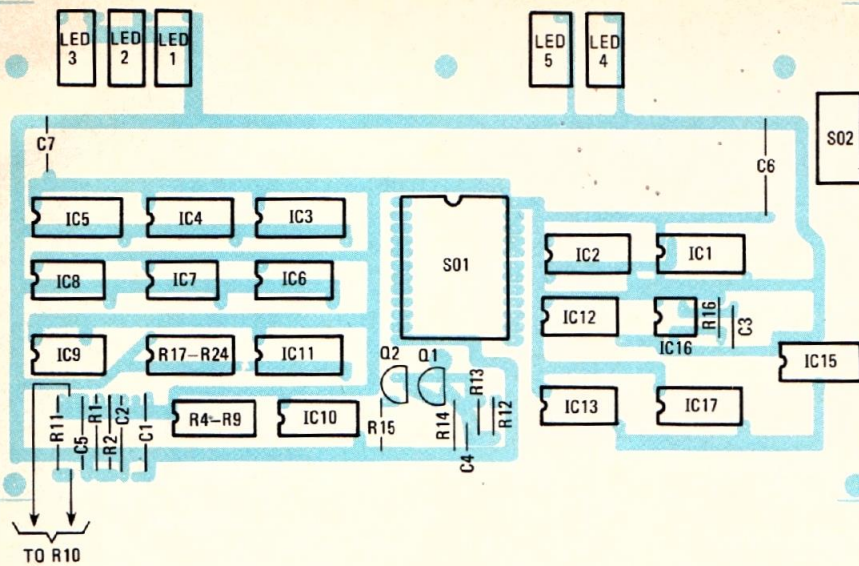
SOCKET SO1 is a 24-pin zero-insertion-force socket used to hold the 2716 EPROM. Zero-insertion-force sockets allow IC's to be inserted and removed many times without causing wear or damage to either the socket or the IC.
